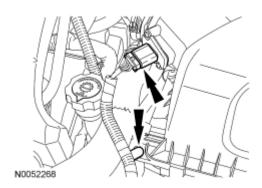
Identifying Wiring Harness Retainer Bolt From Rear Of LH Cylinder Head Courtesy of FORD MOTOR CO.
